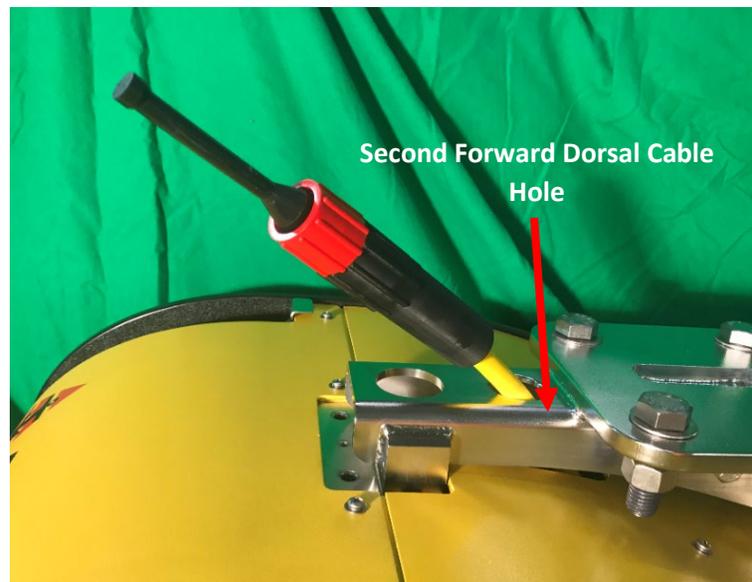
Forward Dorsal Pole Mount Cable Hole Position
